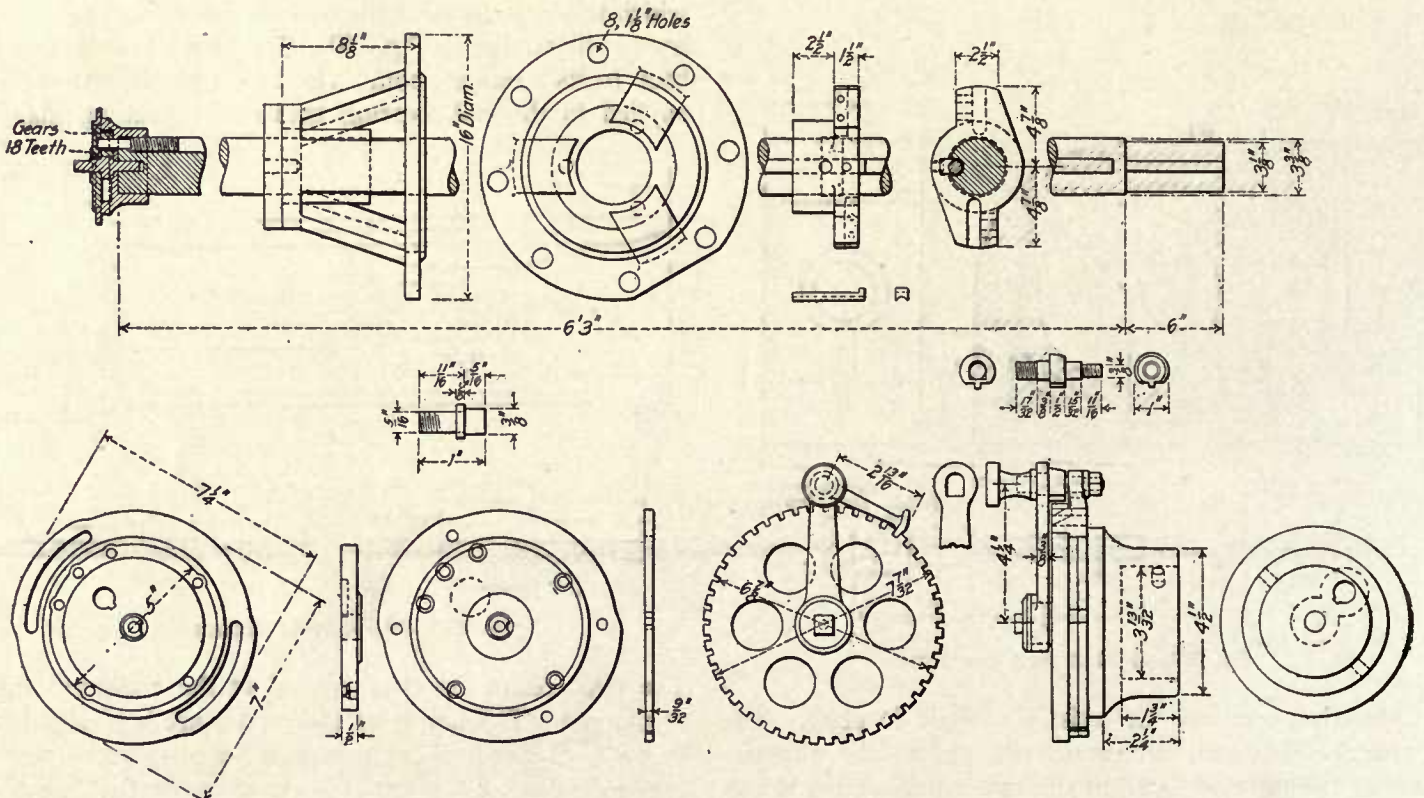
Details of Device for Boring Piston Valve Chambers.
